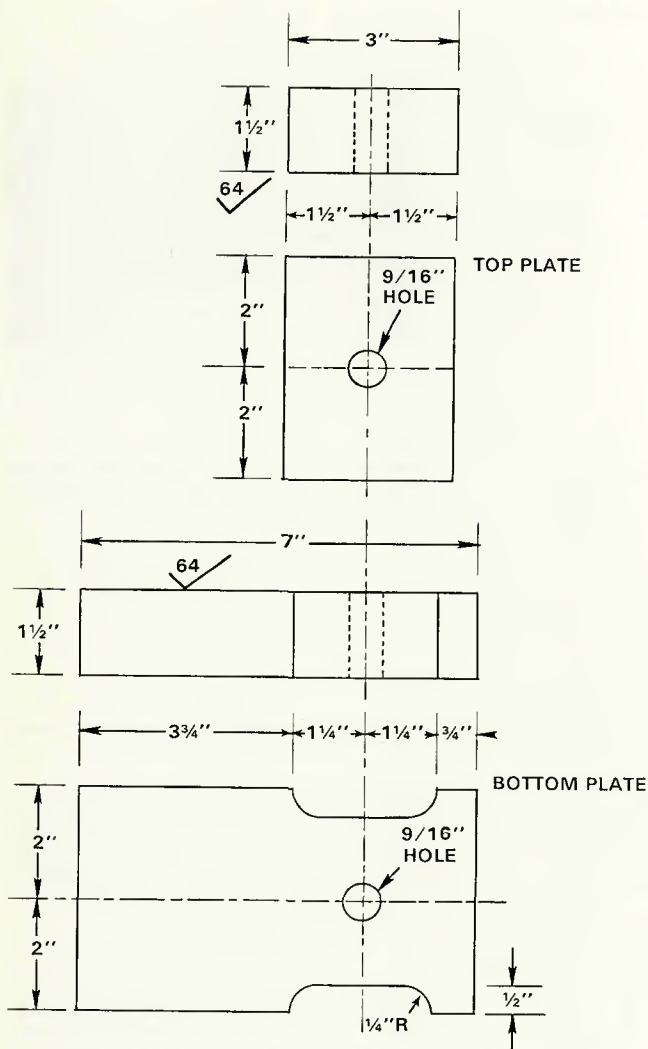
Plates for 1/2 in. modified CTS test assembly
